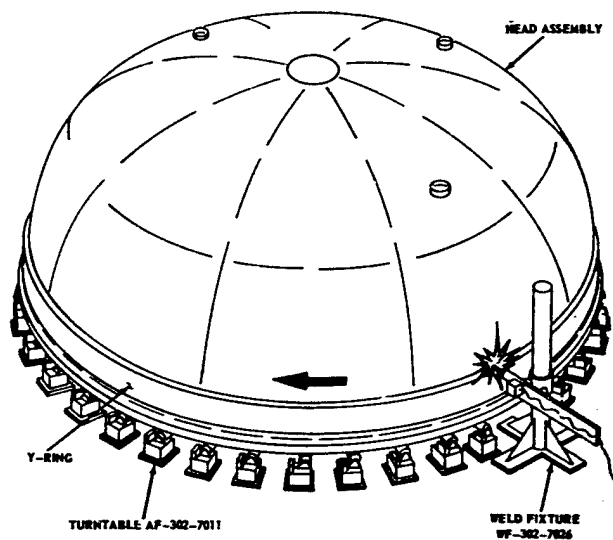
HORIZONTAL WELDING OF Y-SHAPED TRANSITION RING TO THE DOME-SHAPED TANK CLOSURE
